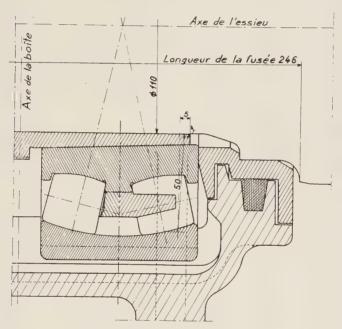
Section of the conical locking ring of S.K.F. roller bearing, showing the rounded edge of the S.K.F. ring (Detail of drawing no VP 15518 — Netherlands Railways)
